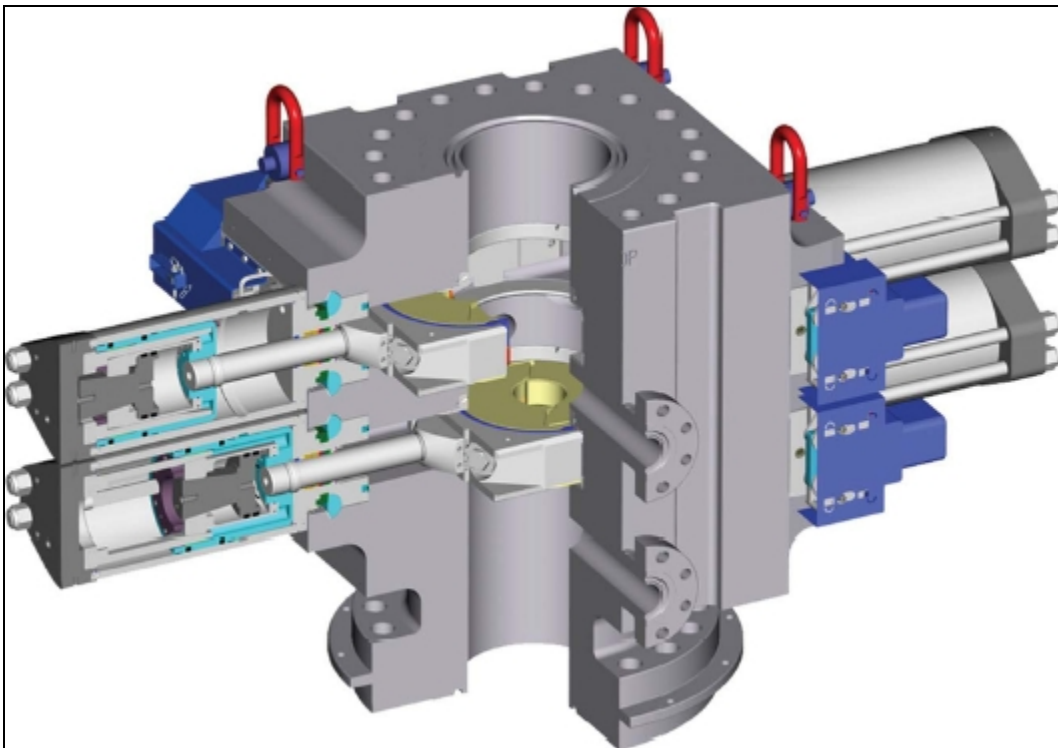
Shaffer NXT-type blowout preventer.⁷
